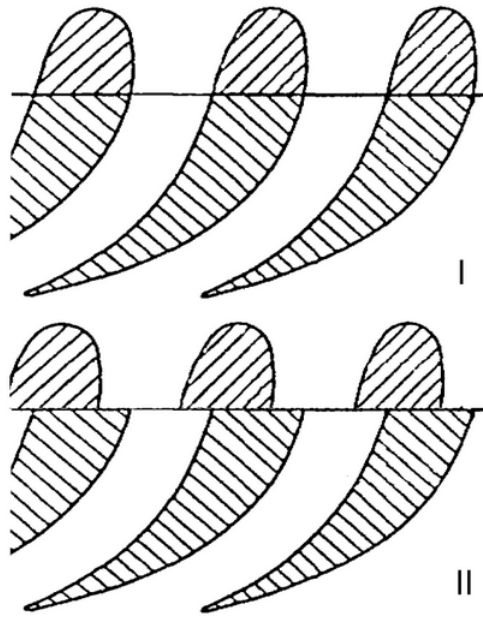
Rotary Valve (Nozzles with Movable Front part)
